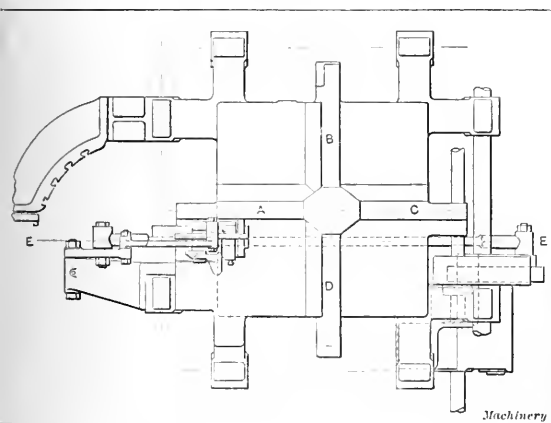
Arrangement of Slides on Nilson Wire Forming Machine
